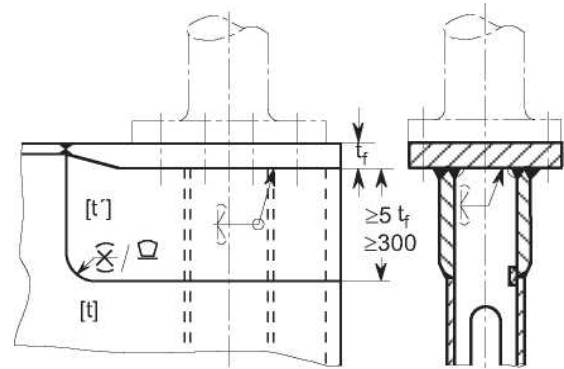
Propeller bracket without integrally cast welding flanges
